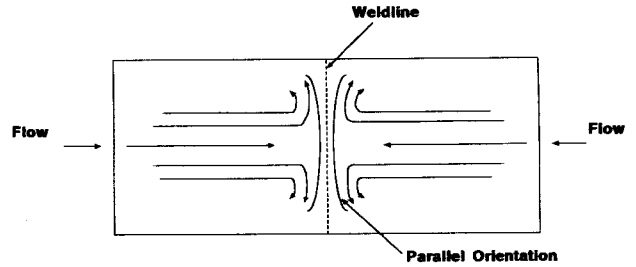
Schematic illustration for the formation of weldline in injection molding.
